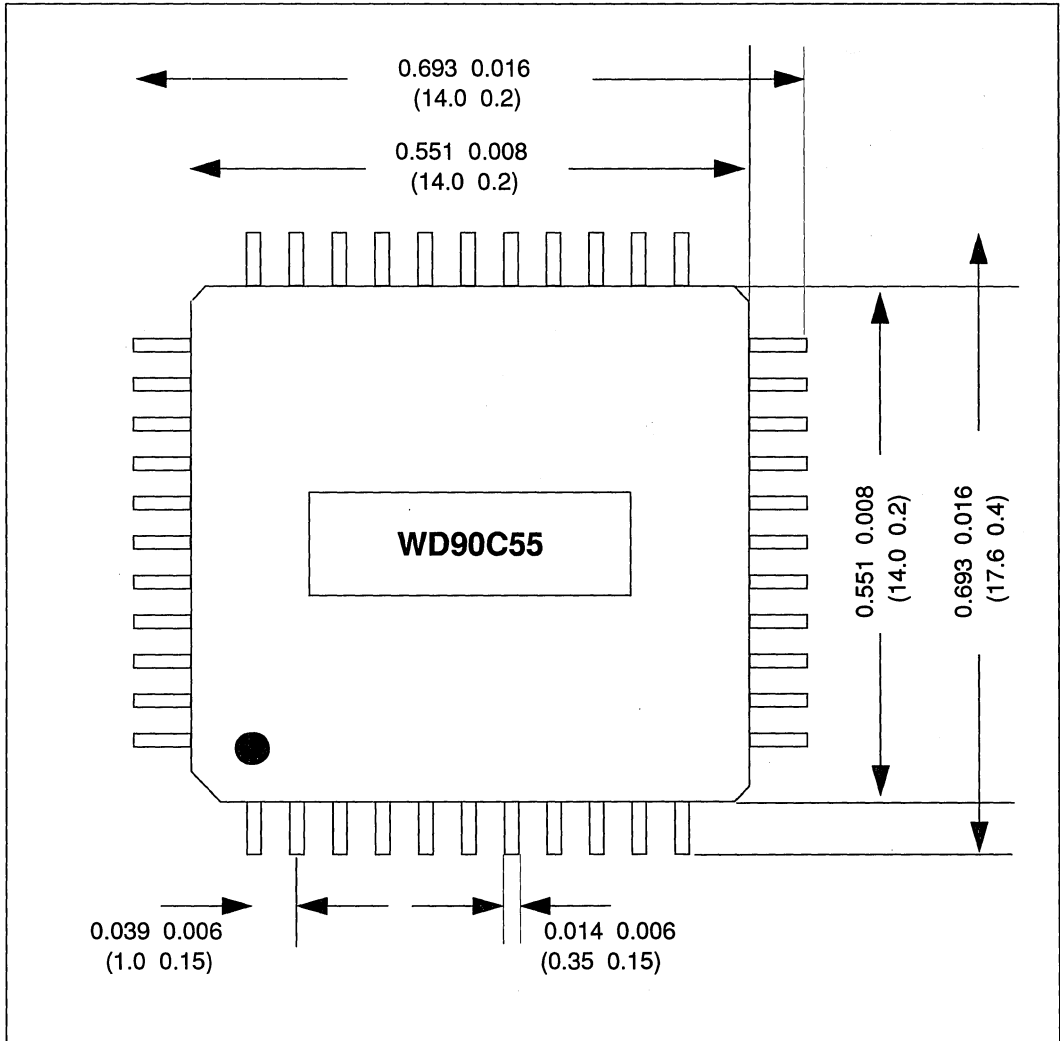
44-PIN LAYOUT MECHANICAL SPECIFICATION
